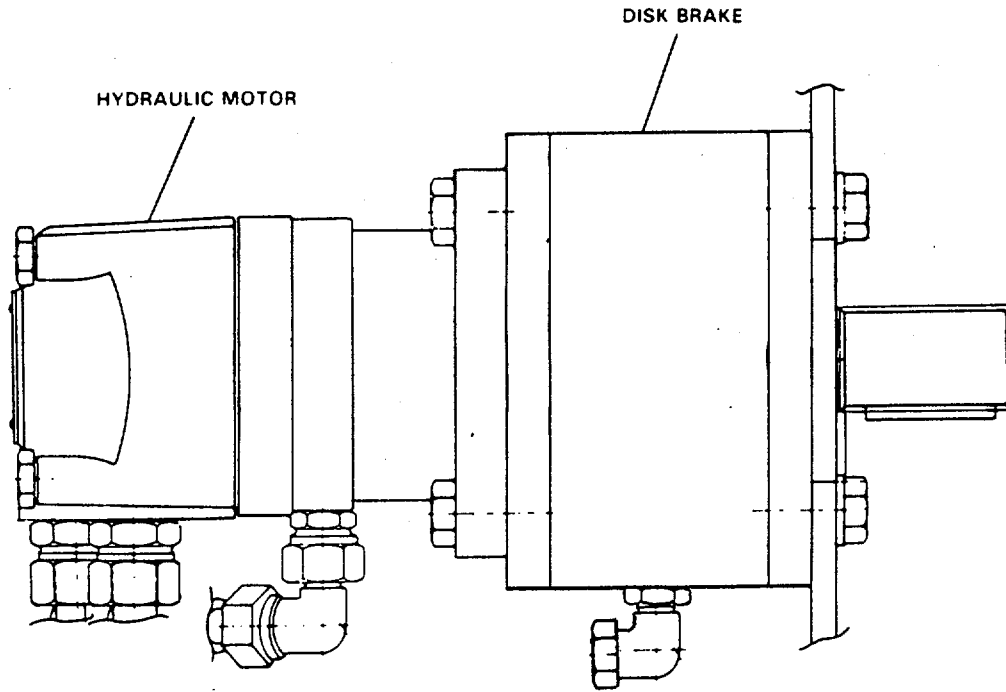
Hydraulic Motor and Disk Brake Assembly.
